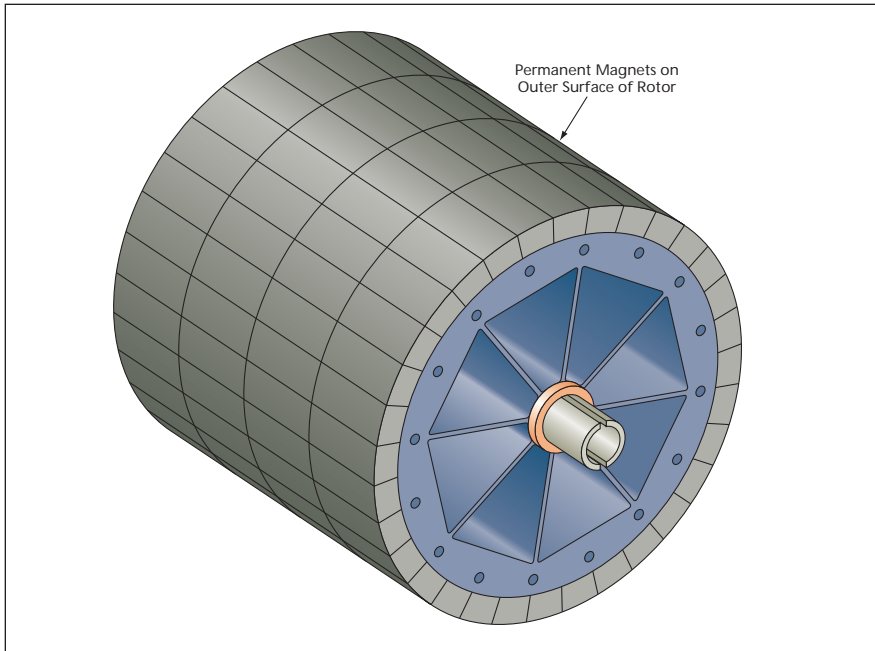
The Rotor in a Radial Halbach Magnetic Bearing has an outer layer consisting of a cylindrical version of the Halbach array of Figure 1. The bearing also includes multiple coils in a stator (omitted from this view) surrounding the rotor.
